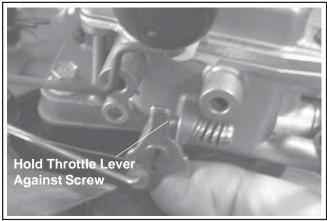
Holding Throttle Lever Against Idle Stop Screw.
